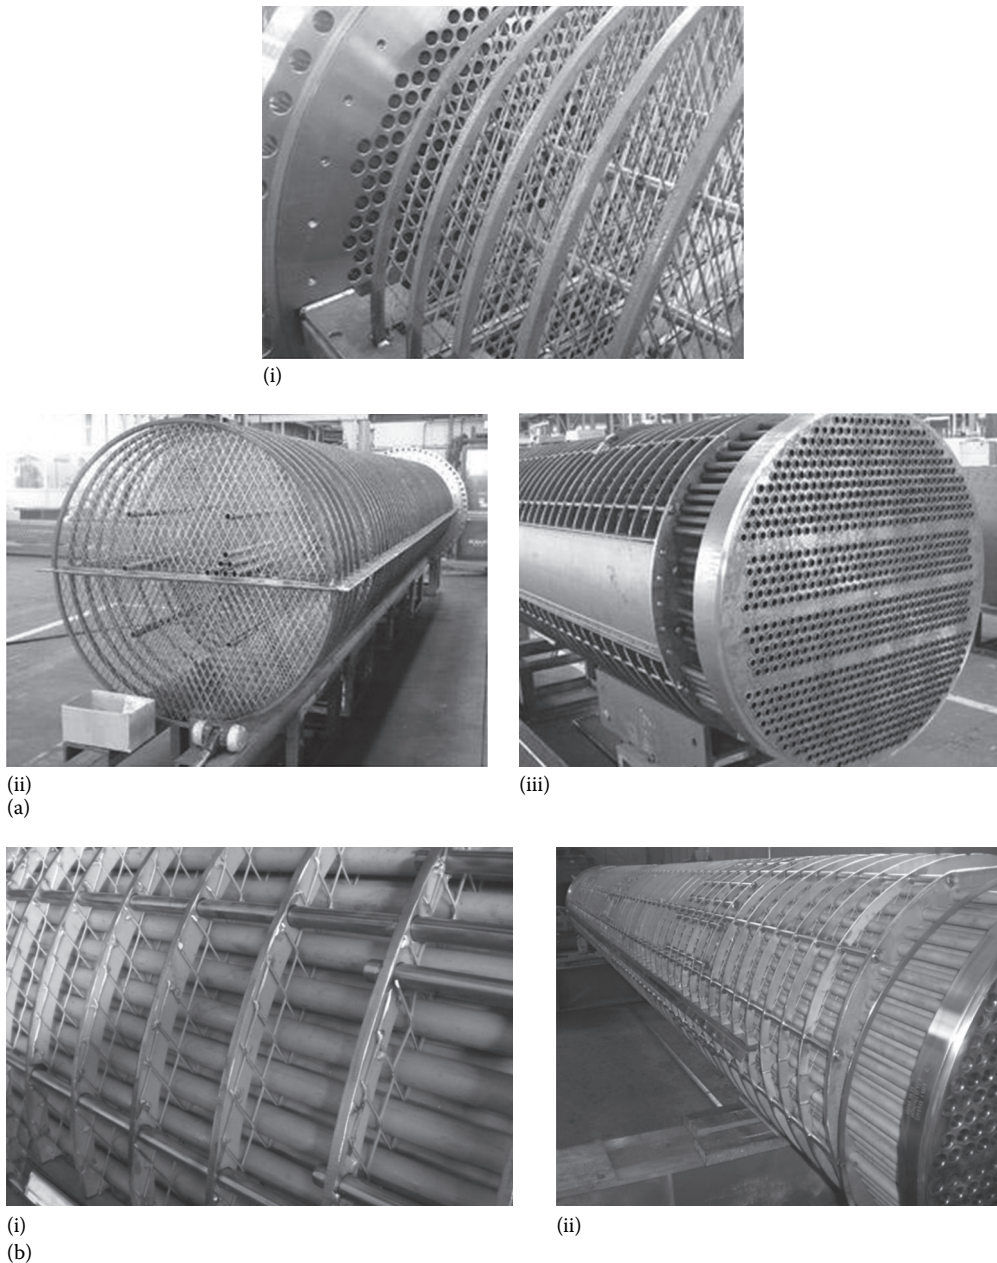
EMbaffle heat exchanger. (a) (i) Sectional view of tube bundle cage assembly, (ii) Tube bundle under assembly, and (iii) Assembled tube bundle (2 passes on the tubeside). (b) (i–ii) EMbaffle heat exchanger tube bundle under assembly. (Courtesy of EMbaffle B.V., LionsParc, A. van Leeuwenhoekweg 38A10, 2408 Amsterdam, the Netherlands.)
